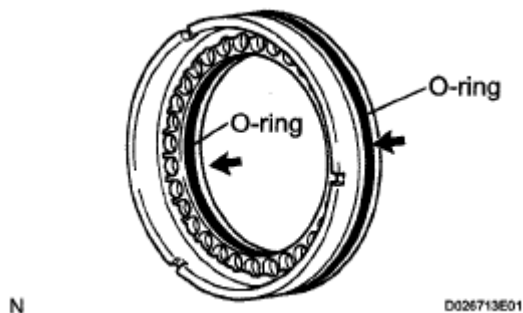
Locating 1st And Reverse Brake Piston O-Rings
